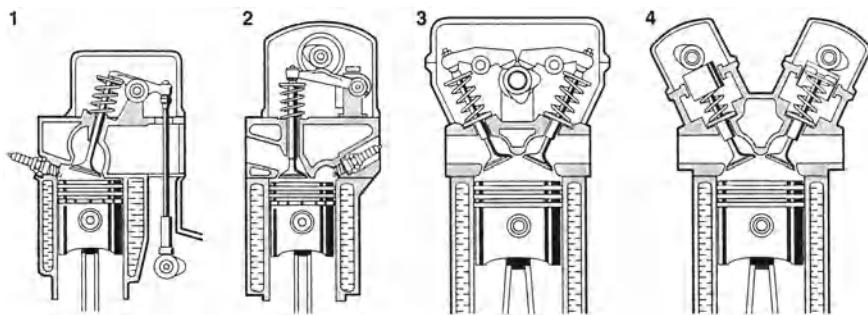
Valve configurations and camshaft drive and positions: 1 Over-head valves (OHV); 2 Over-head valves and Single Overhead Camshaft (1OHC); 3 Over-head valves and Single Overhead Camshaft with double rocker arms; 4 Over-head valves and Double Overhead Camshaft (DOHC) (courtesy of Bosch)
